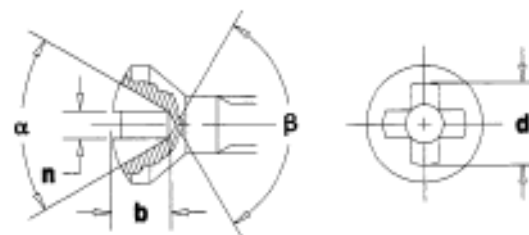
Schematic of Screw with Cross-Recessed Drive Connection (Table A7.2)
